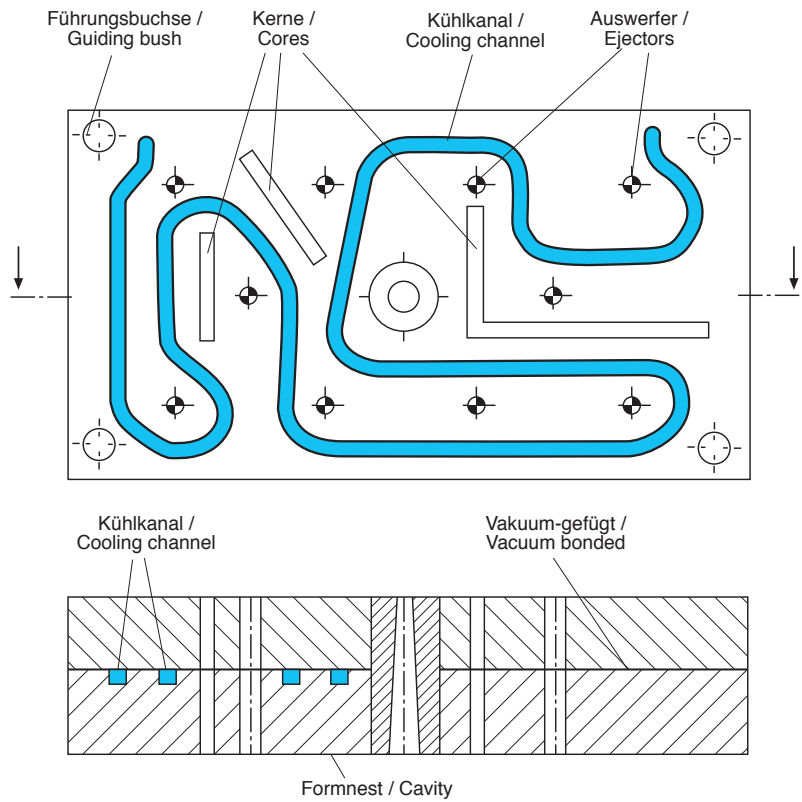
Optimized position of the heating/cooling channels through joined mold plates
